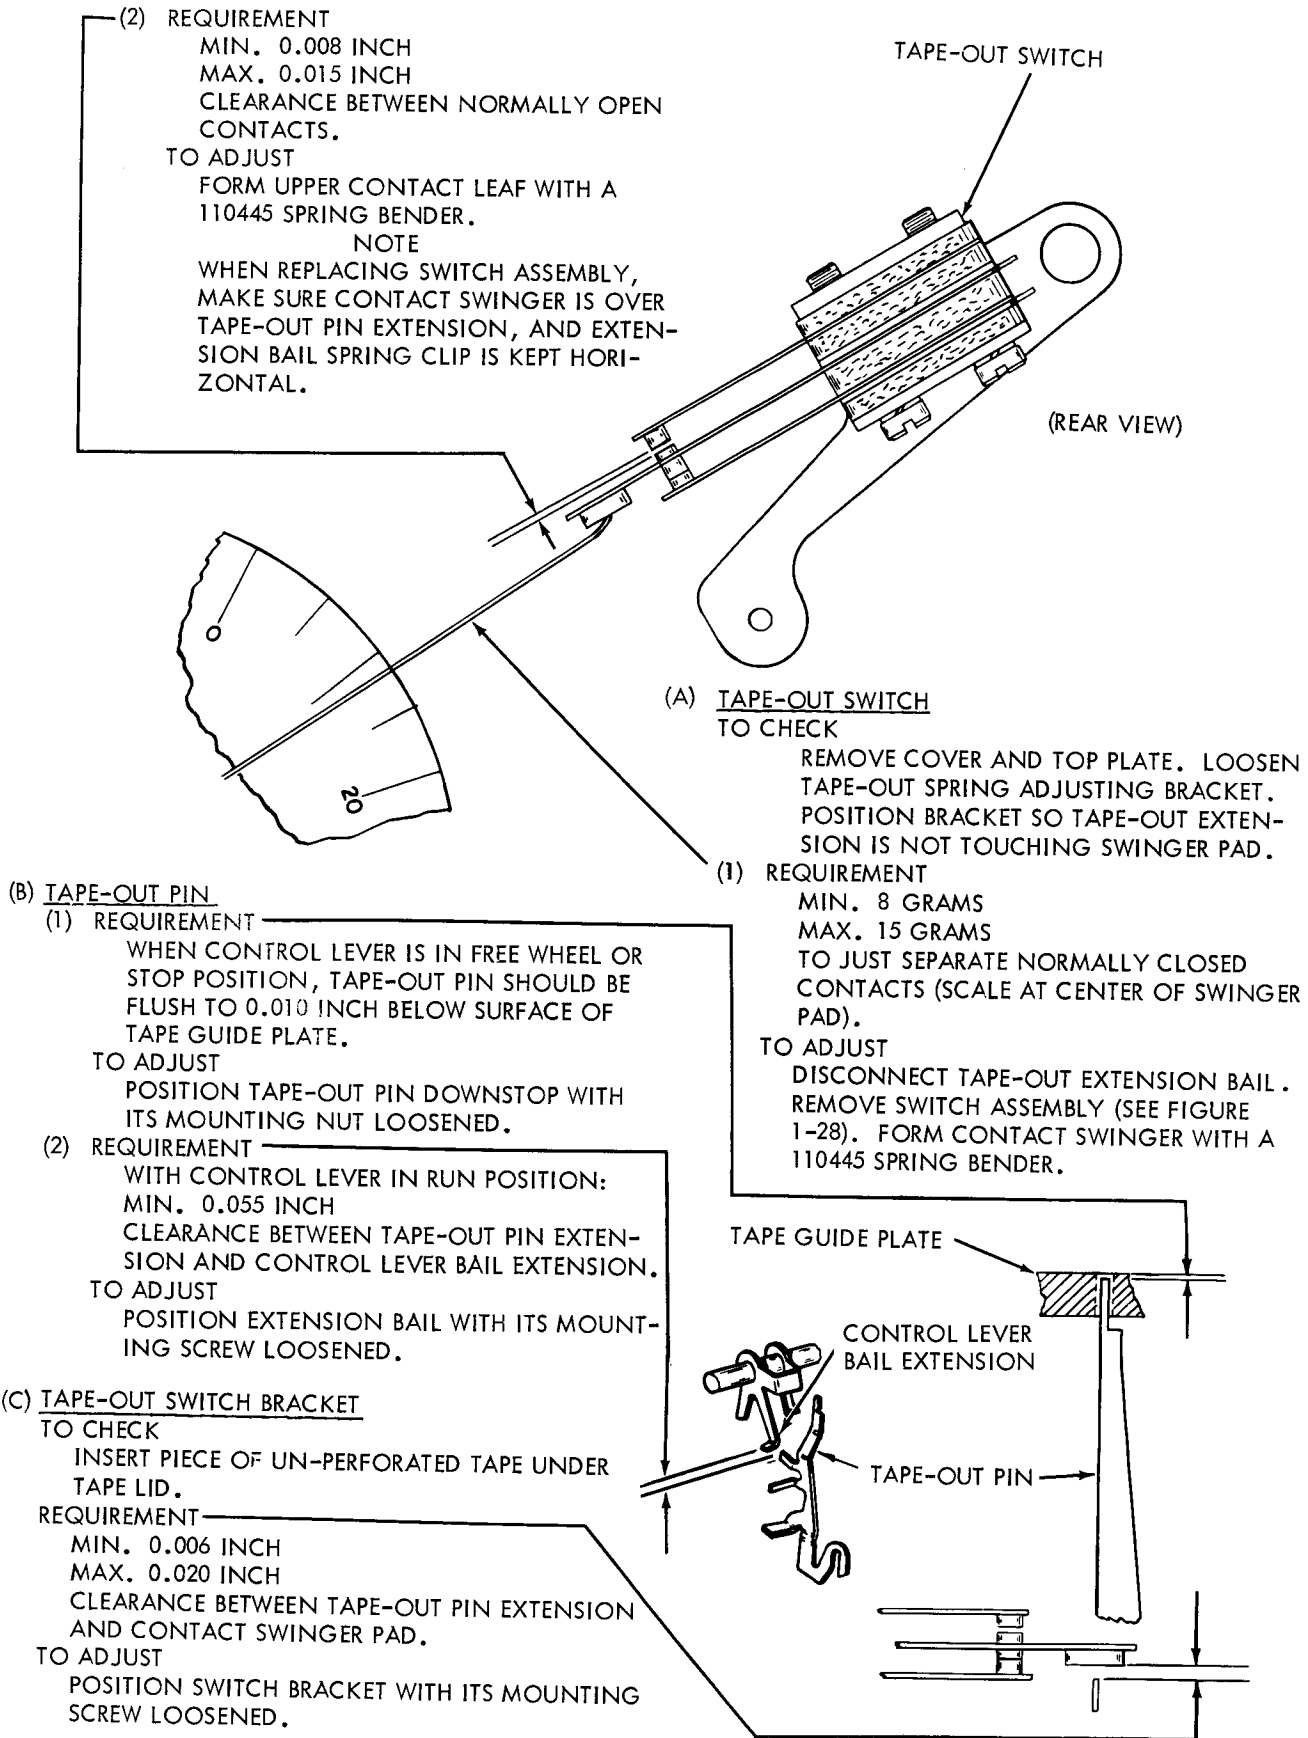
TAPE-OUT SWITCH ASSEMBLY
